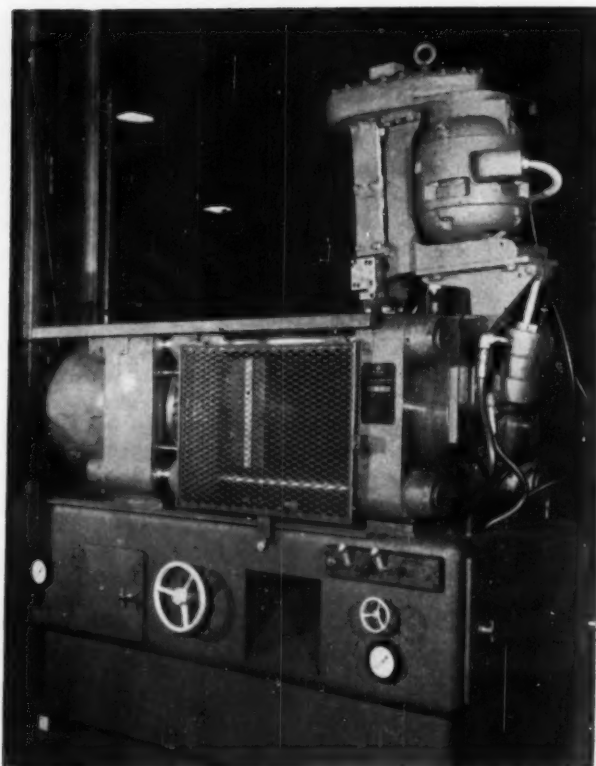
RUBBER-INJECTION-MOLDING MACHINE WITH 400-TON HORIZONTAL CLAMP
